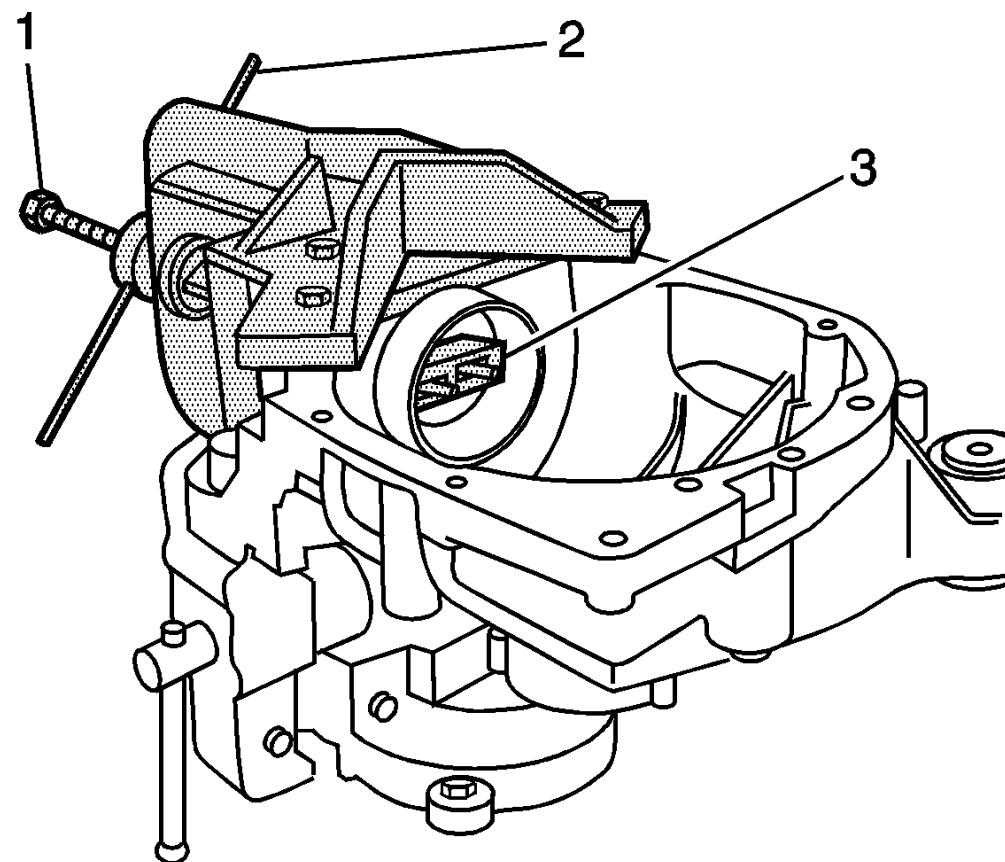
Pressing Inner Bearing Cup Out From Differential Carrier Case
